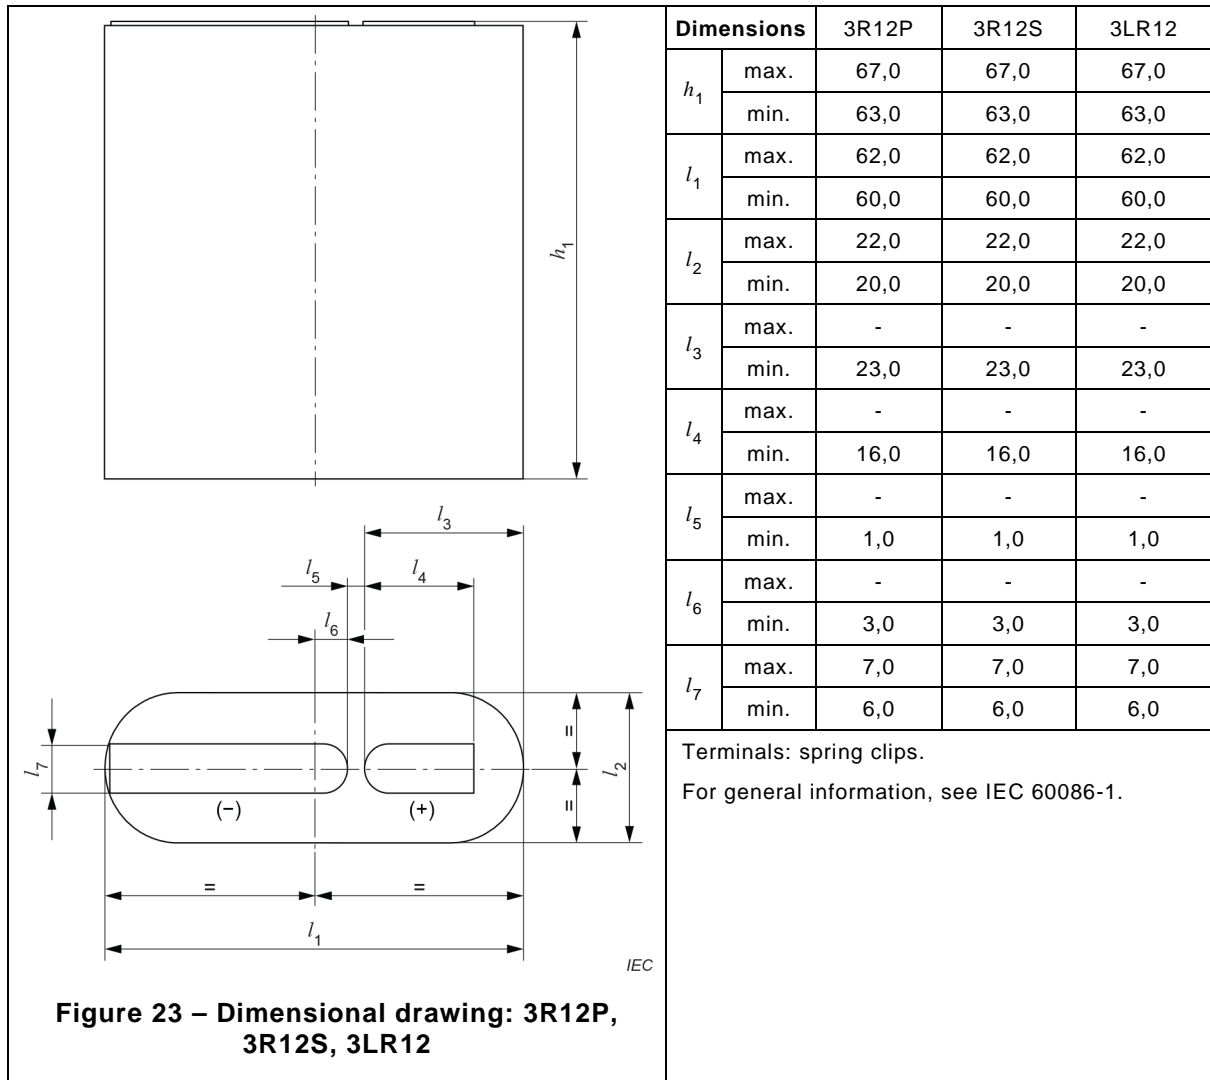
Dimensional drawing: 3R12P, 3R12S, 3LR12
